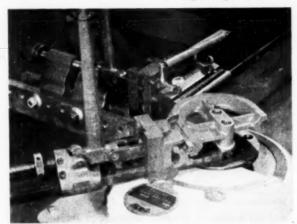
Tube Bending Equipment (Parker 848 Tube Bender).
